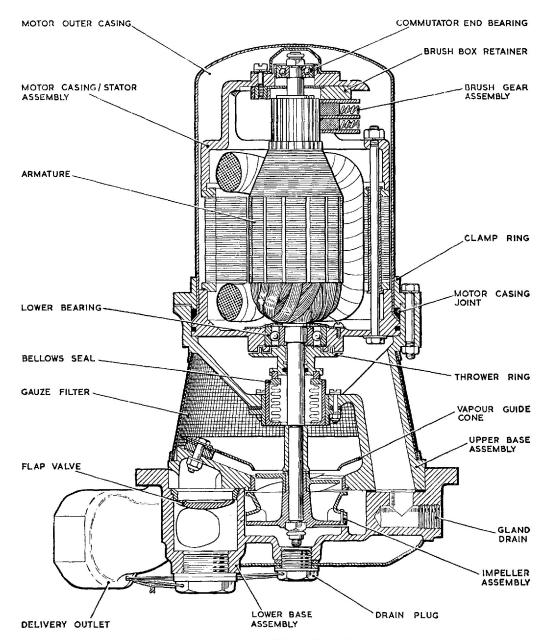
Sectional view of SPE. 1003, Mk. 3 fuel pump
